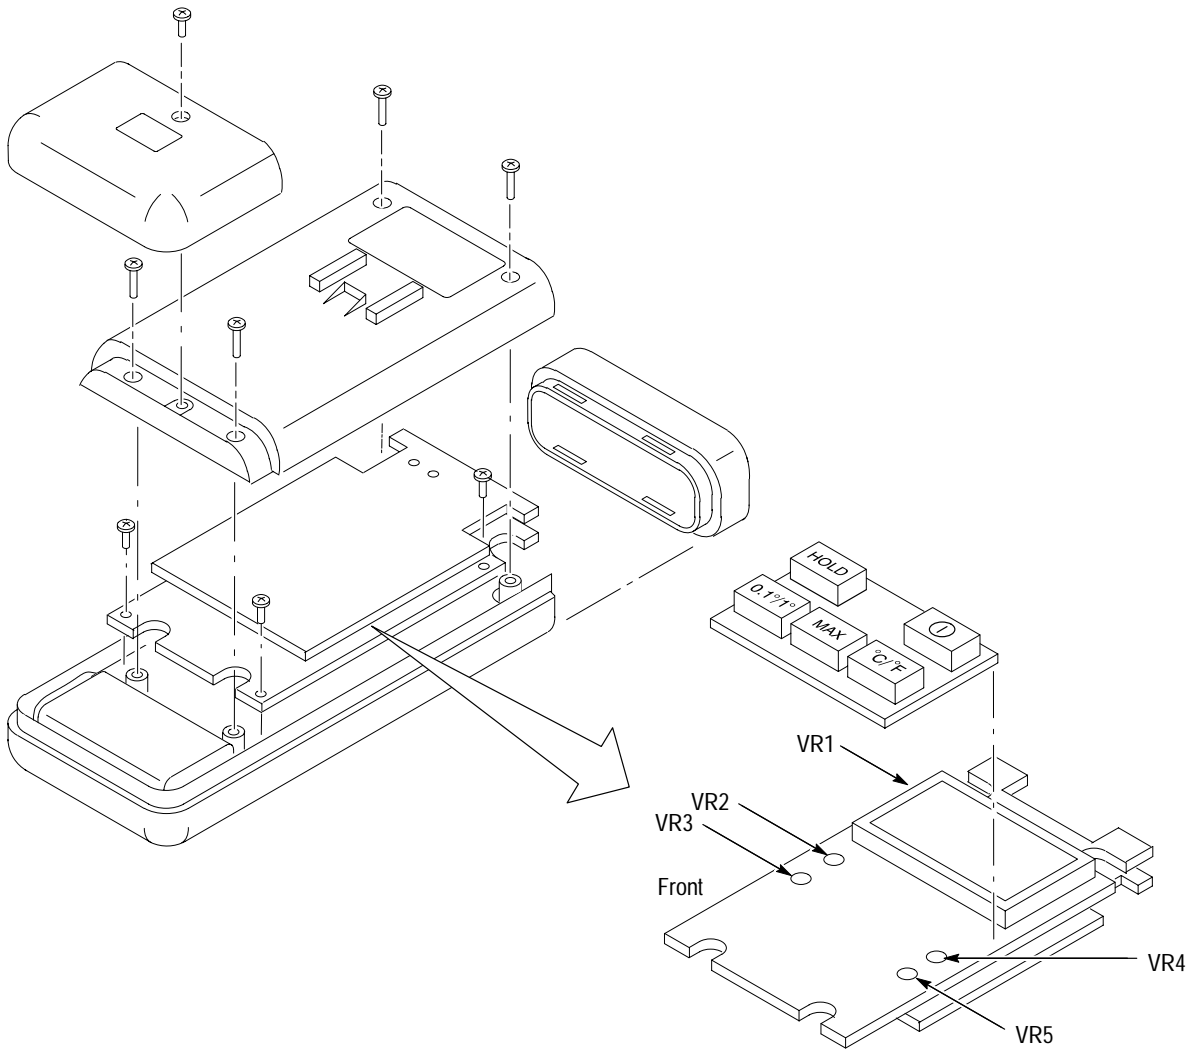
DTM900 Thermometer disassembly and adjustment locations
